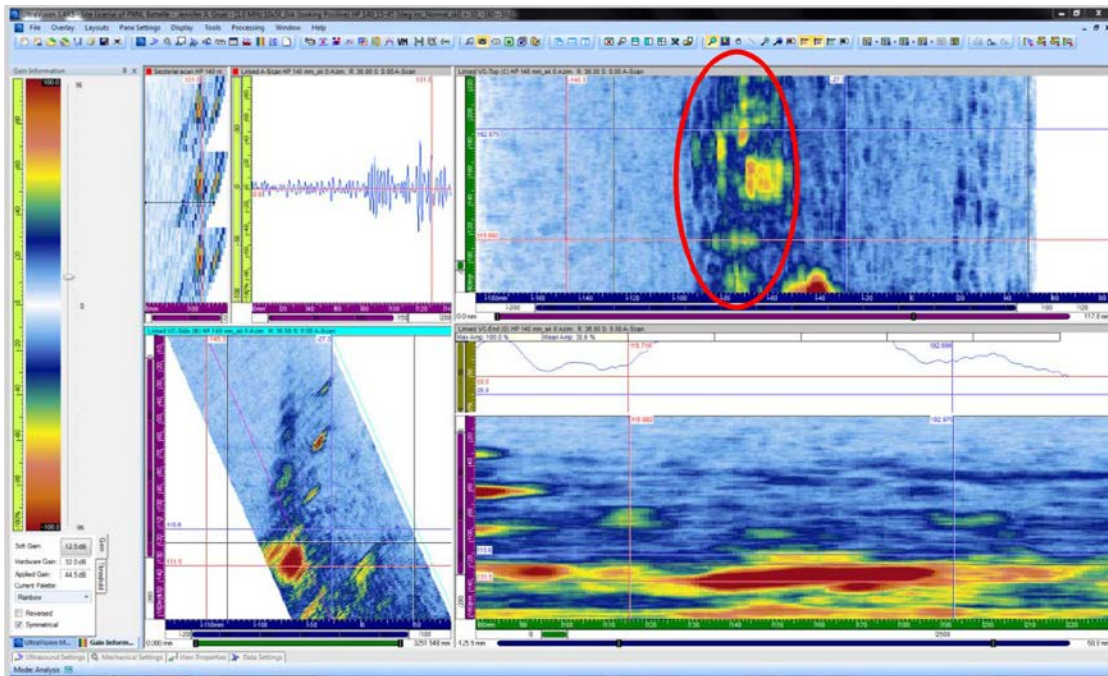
DM-10 CCW Skew 0 View of Axial Flaw 3 with Artifact Circled in Red
